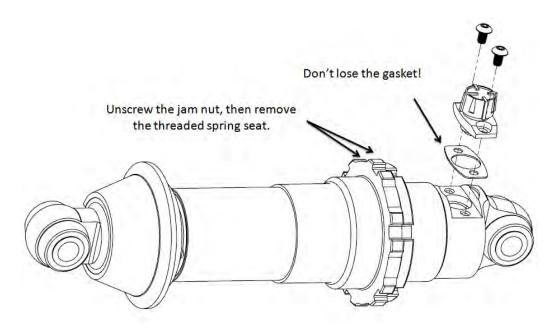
The shock adjustment knob must be removed for installation of the spring.
